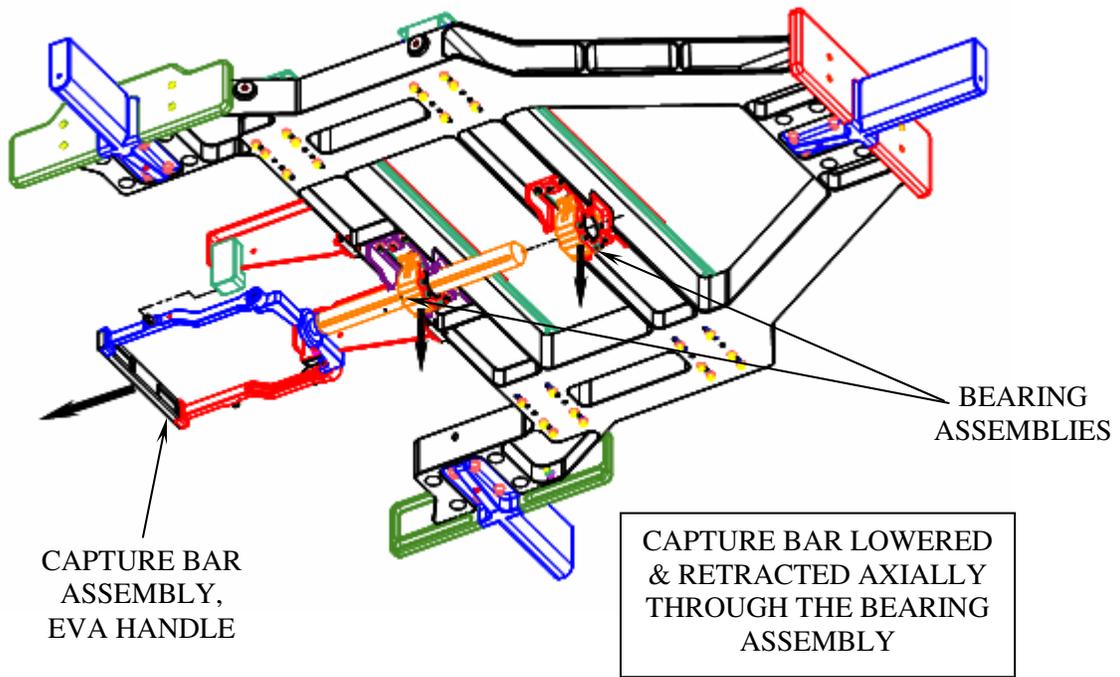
Capture Bar Assembly from AMS-02 Passive PAS
